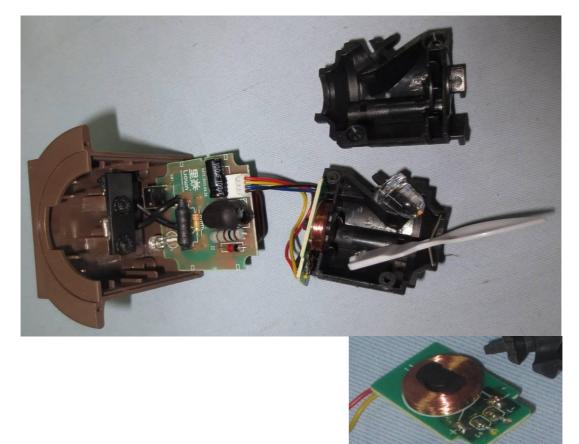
PCB view of model LW3008; ENLMFANL-
